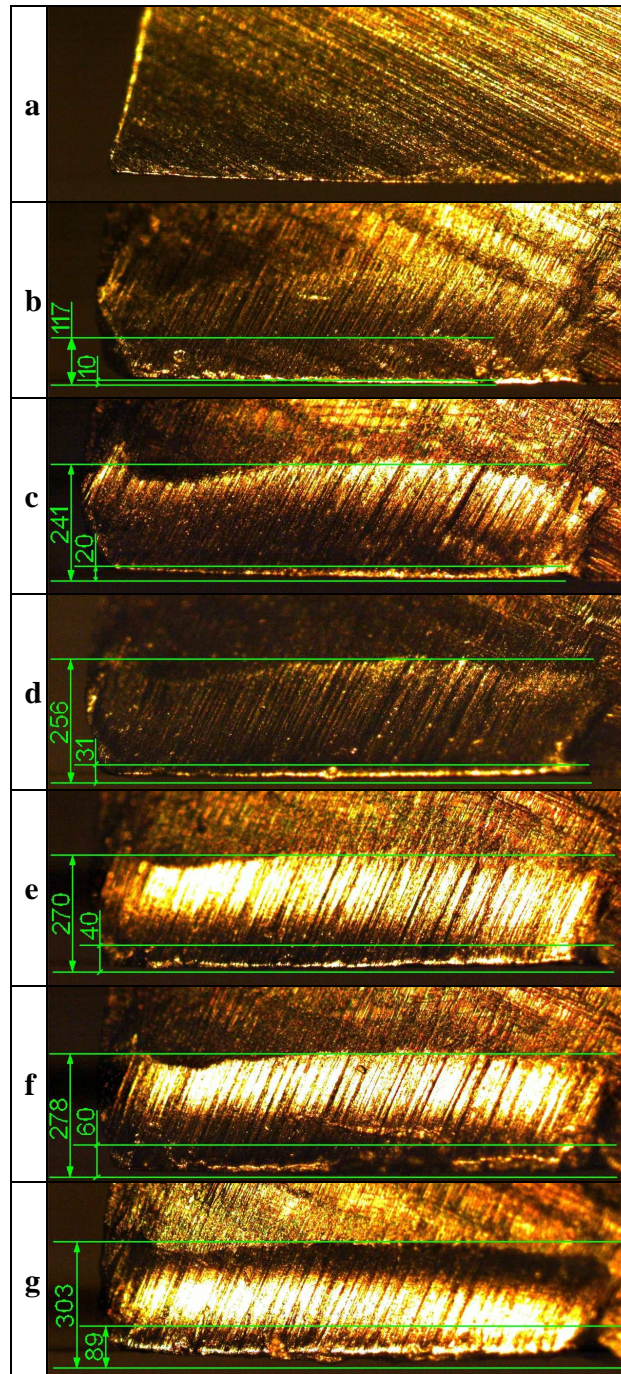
MTE 9mm end mill tooth # 1 linear toolpath rake face wear a) Fresh tool, b-g)
